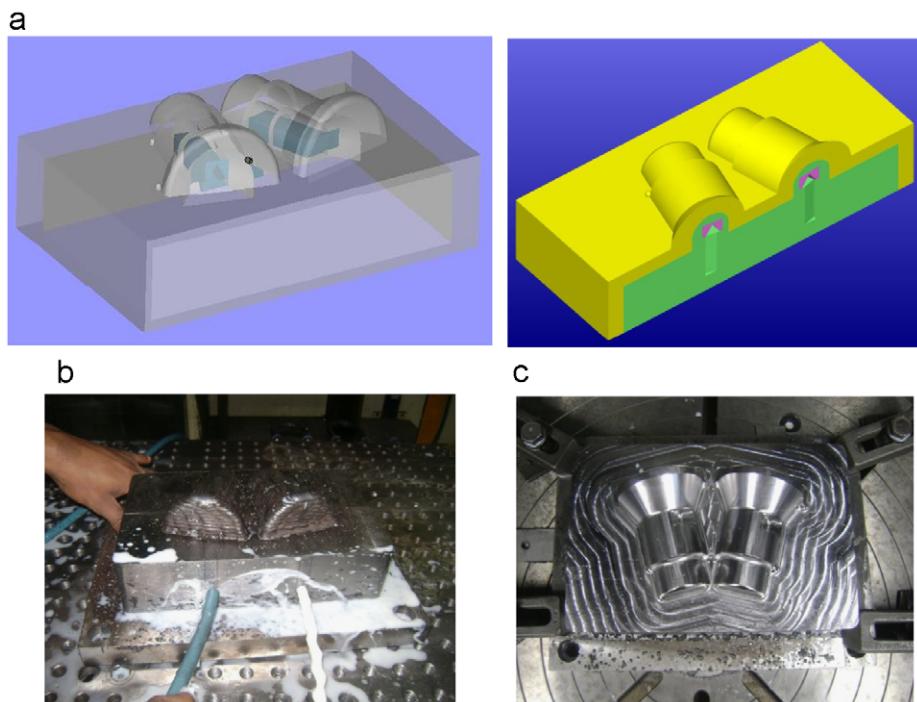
Manufacture of the punch of a composite injection mold with triangular conformal cooling ducts using the 3-axis HLM. (a) CAD model of the punch, (b) Testing of the conformal cooling duct in the near-net punch and (c) Finish machining of the punch.
